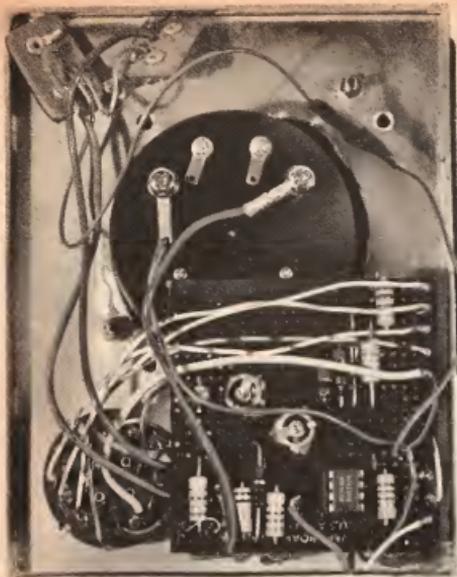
Wiring and component layout details for the in-circuit ohmmeter
